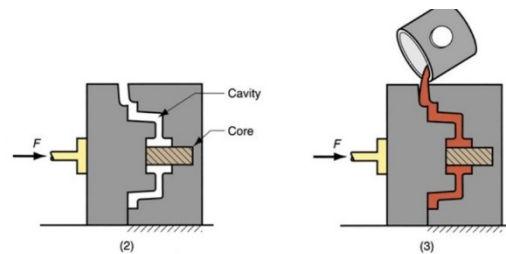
Steps in permanent-mold casting: (2) cores (if used) are inserted and mold is closed; and (3) molten metal is poured into the mold. As the metal solidifies, the mold is opened and the part retrieved.
